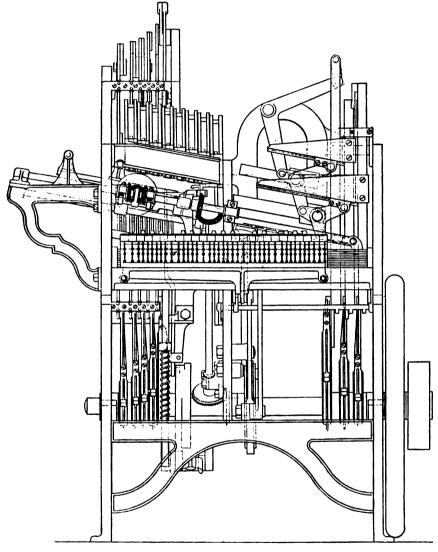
Felt composing, line-justifying, and distributing machine. General arrangement.
